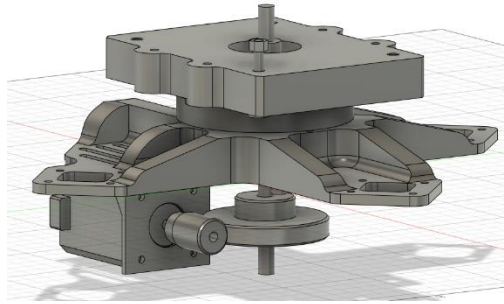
Overview of Horizontal Rotation Mechanism with Worm Gear Set
